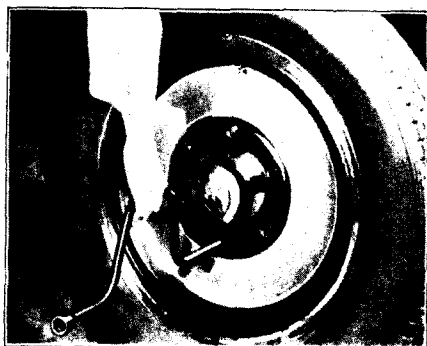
In mounting disc wheels, use the rear end of the brace wrench as a pilot bar.
